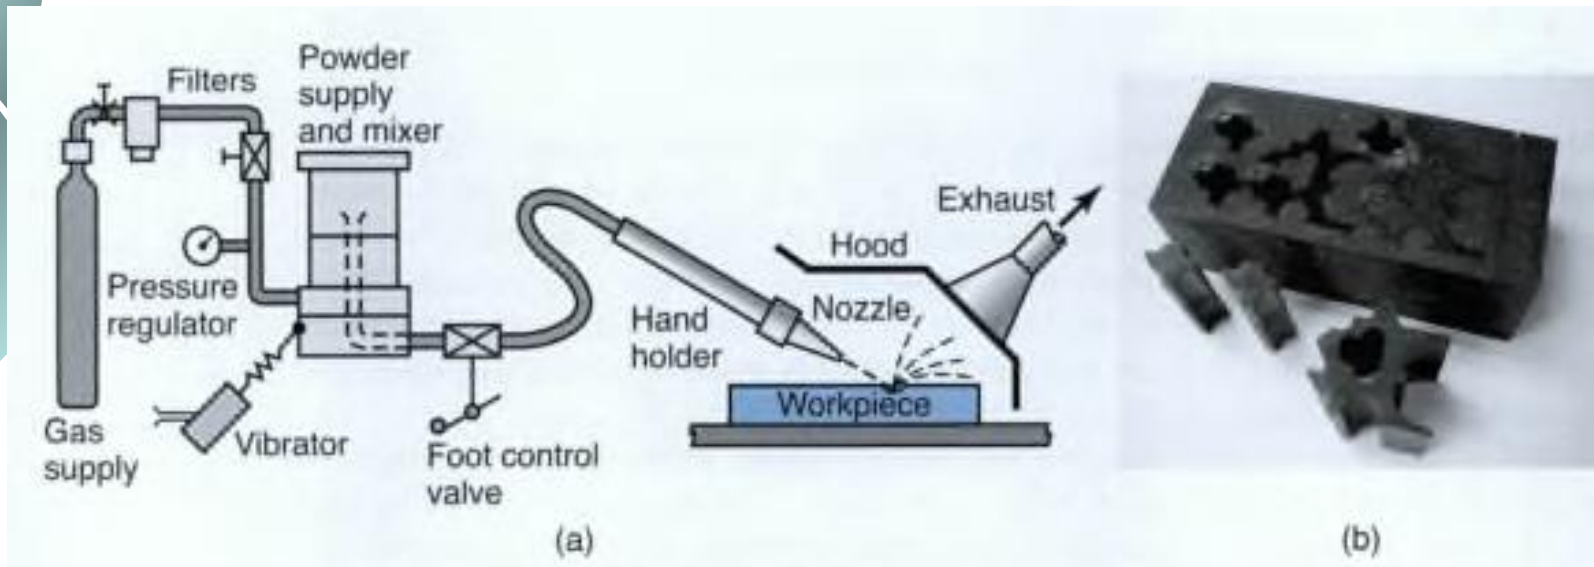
(a) Schematic illustration of the abrasive-jet machining process. (b) Examples of parts made by abrasive-jet machining, produced in 50-mm thick 304 stainless steel. *Source:* Courtesy of OMAX Corporation.
